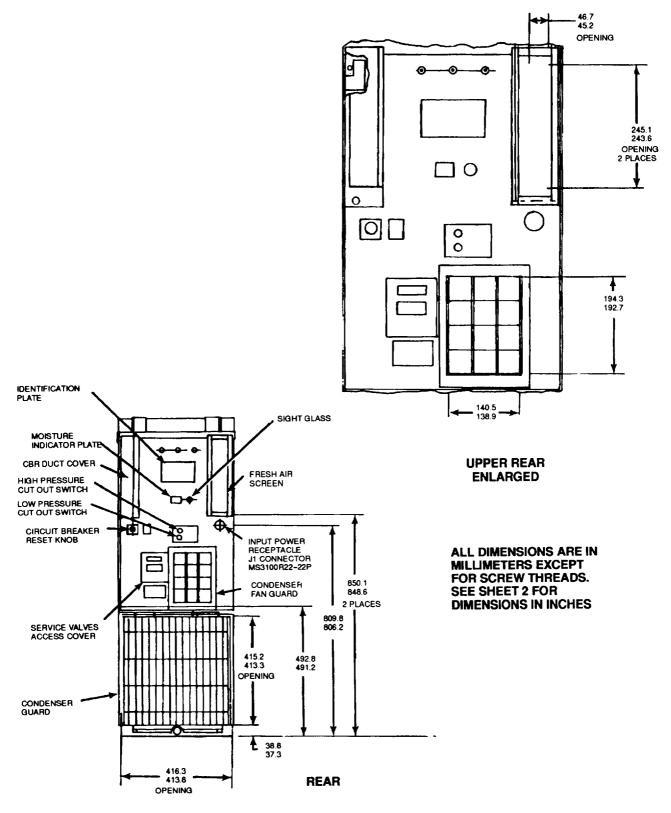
Installation Dimensions (Sheet 4 of 4)
